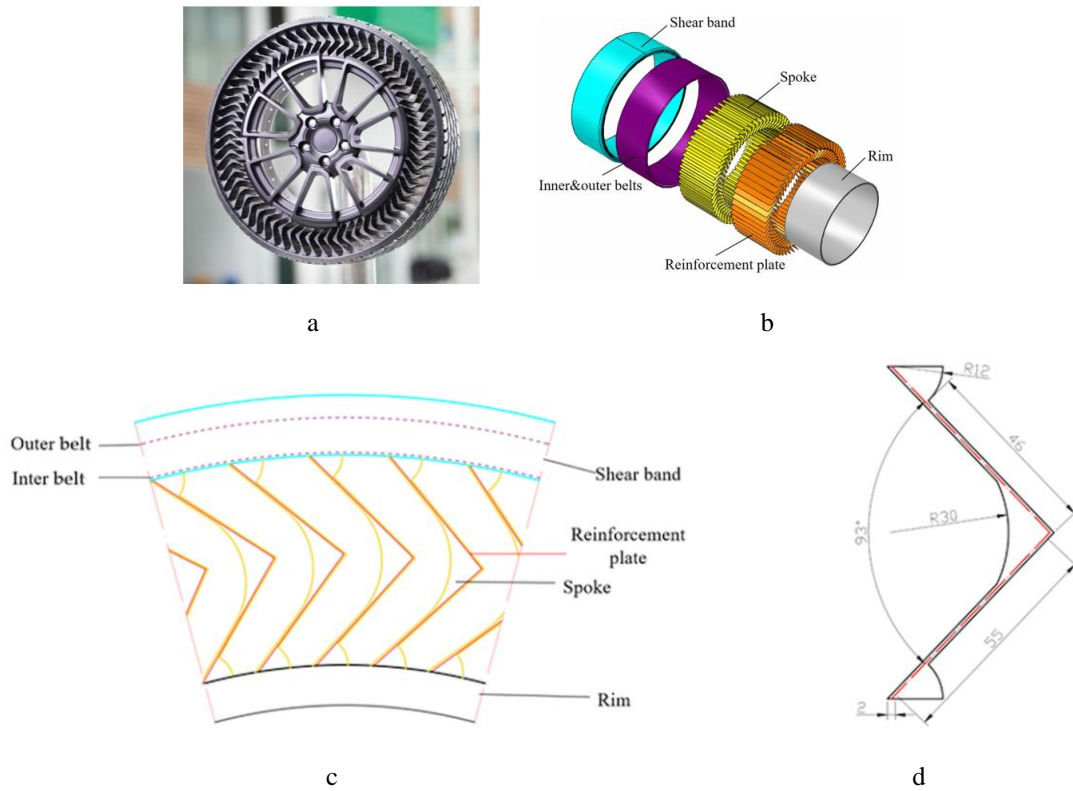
UPTIS NPT: a – physical view, b – exploded view, c – cross-sectional view, d – spoke size
